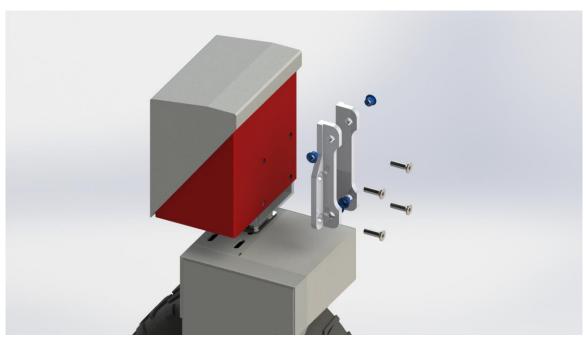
The suspension brackets are bolted onto the wheel module, with the belonging glide bearings.
